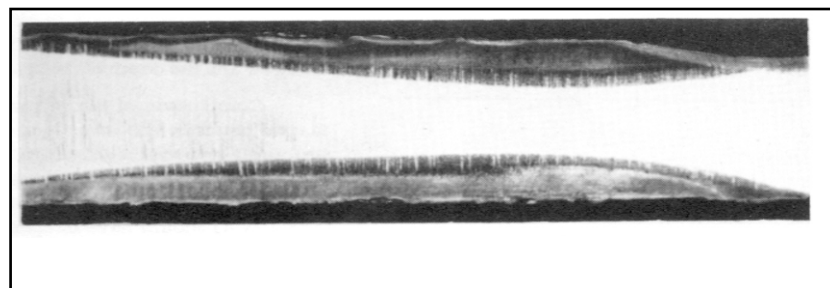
Macrostructure of an EDM Specimen<sup>65</sup>
